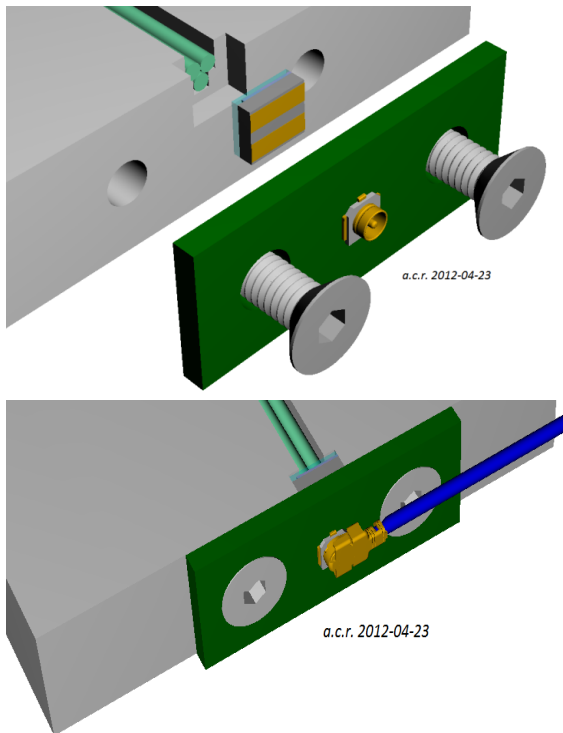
details of the three WLS fibers and the PCB for the solid state detector
